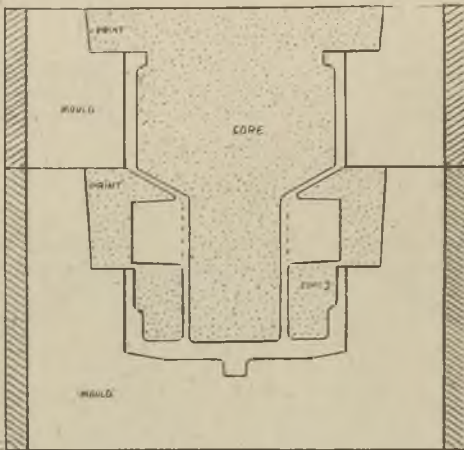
USUAL METHOD OF MOULDING A ZEPHYR TYPE PISTON.
